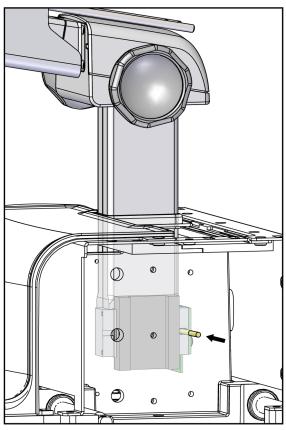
Dowel pin in center alignment hole for Y-axis assembly
